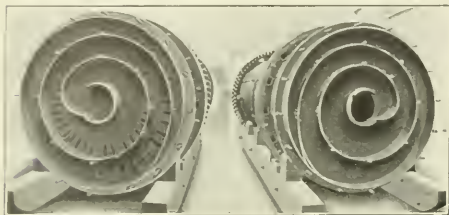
DISCHARGE END AND FEED END OF PEBBLE TUBE MILL.
